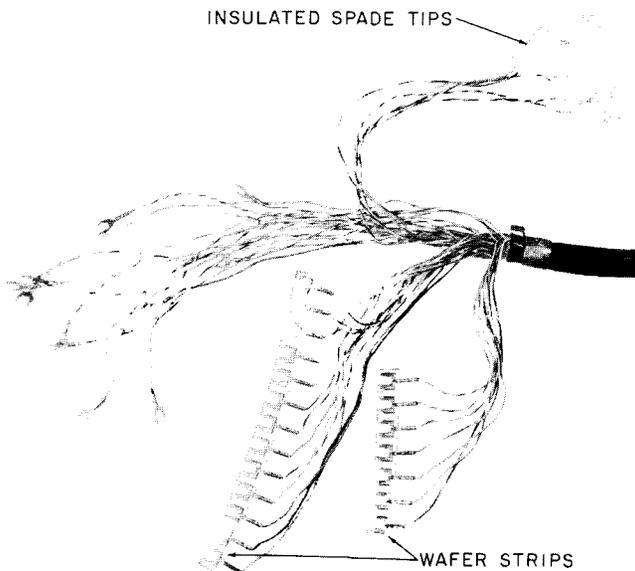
Slotted Wafer Strip End of Mounting Cord, Later Type
